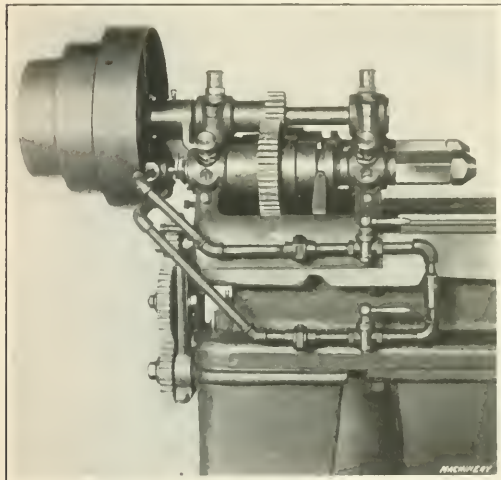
Close View of Head End of Machine with Guards removed to show Transmission
